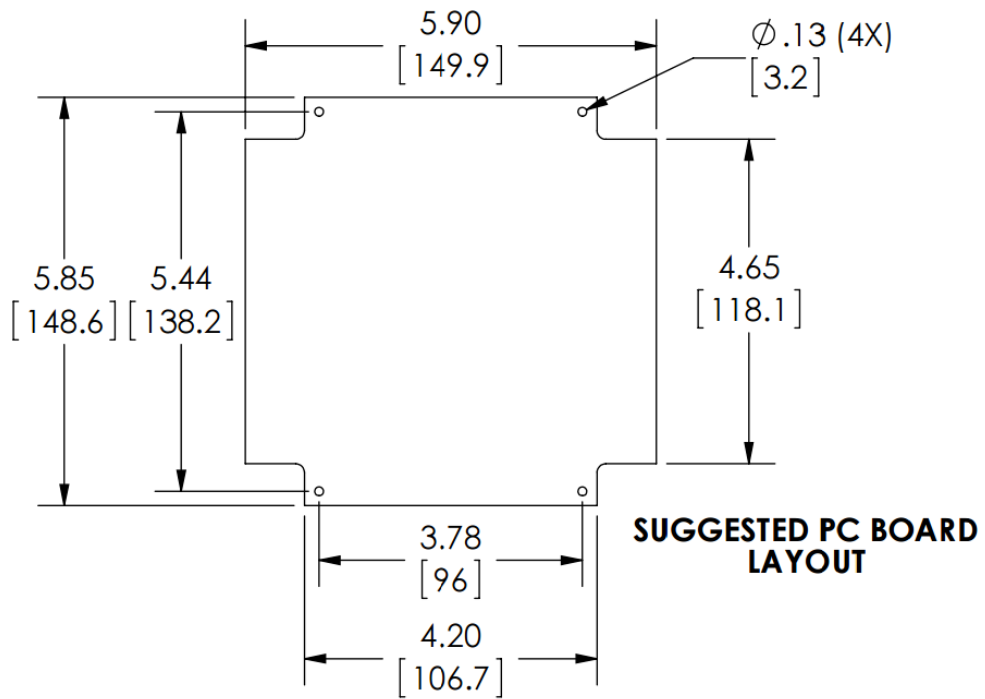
The recommended Dimensions for a PCB in the head enclosure.
